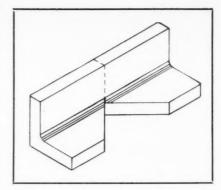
A—Drawing showing use of structural angle iron for right-angle support.
